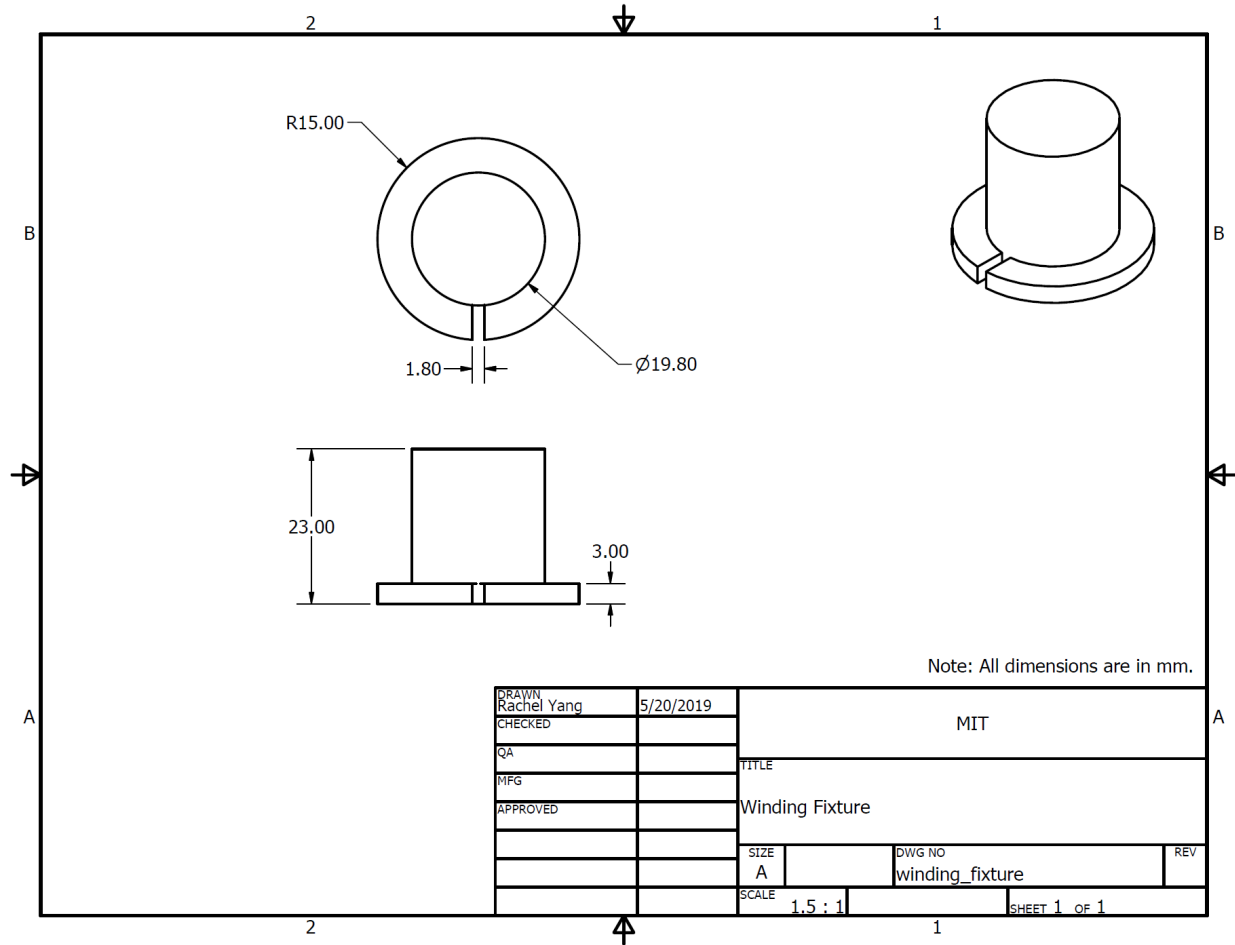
CAD drawing of the custom 3D-printed fixture for the winding (see Fig. E.1b)
